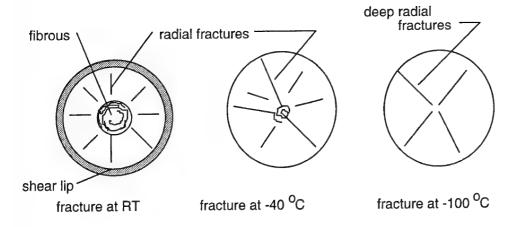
Fracture progression in plain tensile specimens, after Larson and Carr [13].
